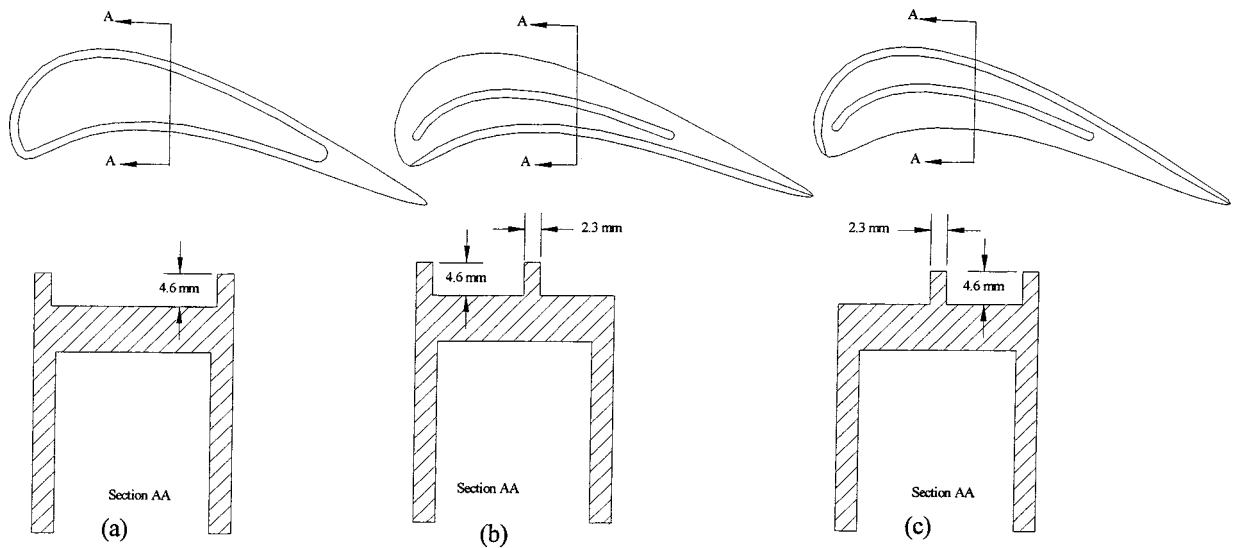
Removable squealer tip-various two-sided squealer geometry
